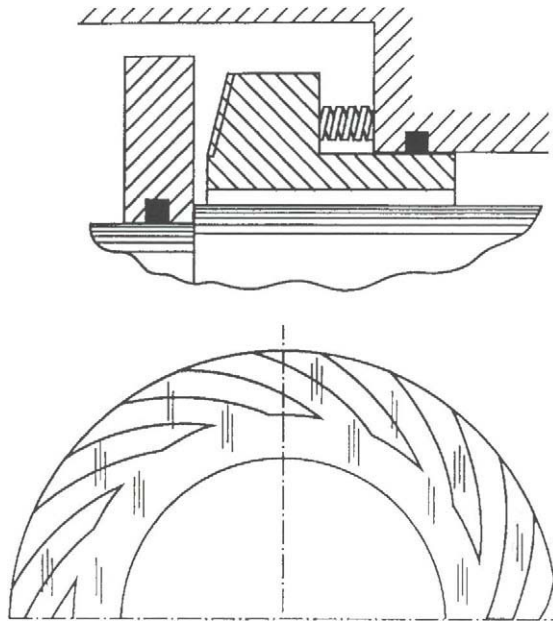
Dry gas seal. Top: typical design for curved face – spiral groove non-contact seal; curvature may alternately be on rotor; Bottom: Typical spiral groove pattern on face of seal typical non-contact gas seal (Courtesy of John Crane Co.)
